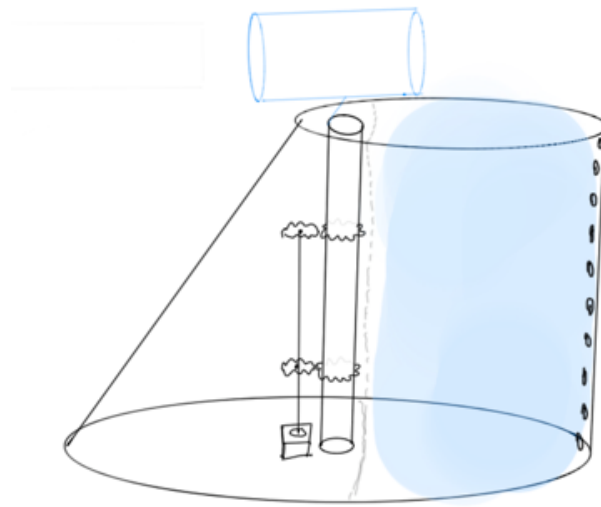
Aileron attachment mechanism - a circular shaft connects to gears that are turned by a servo
